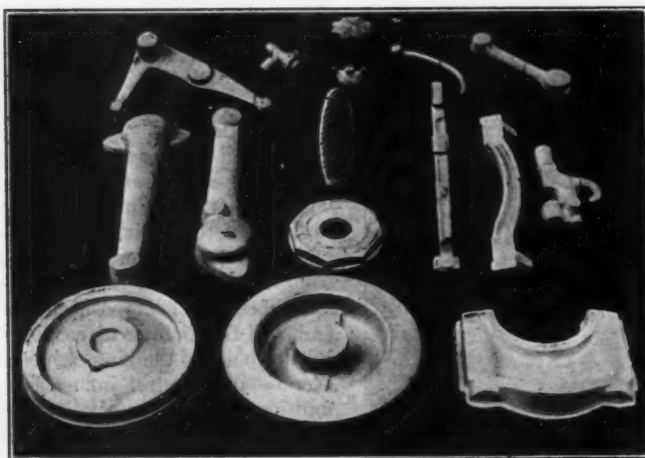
FORGINGS AND PERMANENT-MOLD CASTINGS
